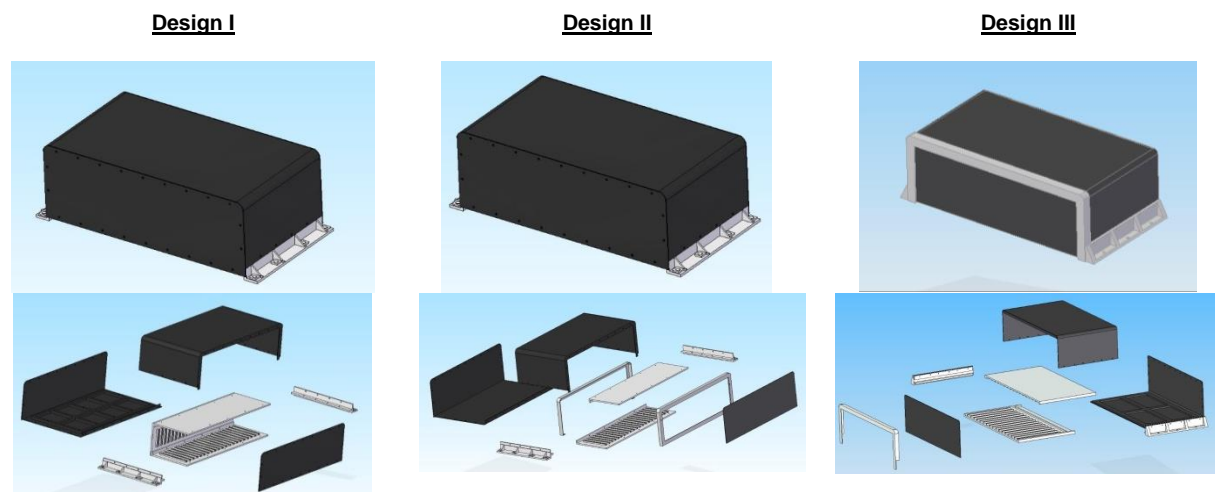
The three designs for the composite space electronic housing CAD elements, line 1: closed and line 2: exploded configurations
